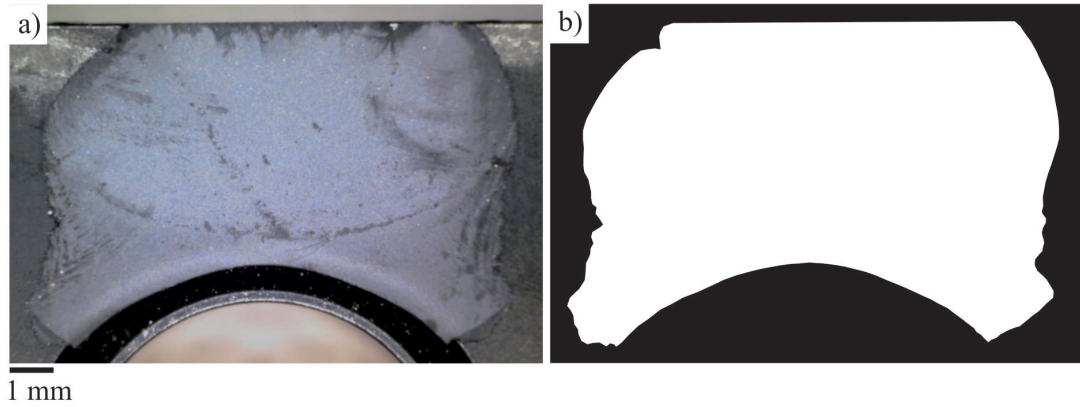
a) Macroimage of tool damage induced during orthogonal cutting tests b) silhouette of damaged area used to measure tool damage area.
